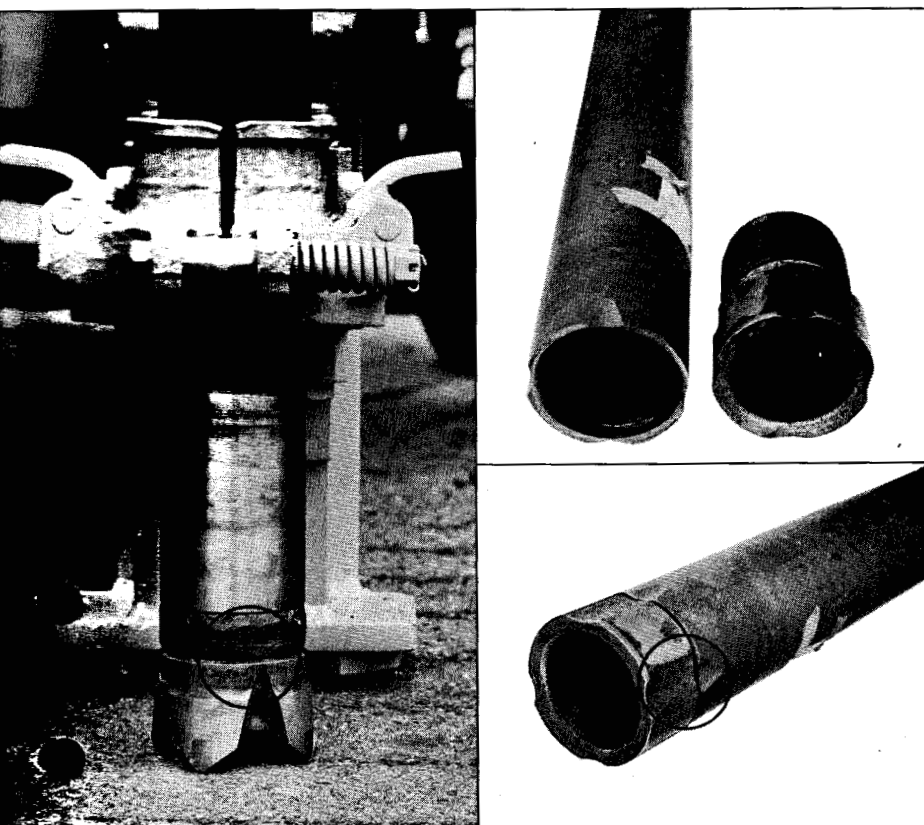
Unfavourable wear on the driver chuck and casing which is caused by the cutting grooves of the bit coming against the same section of the driver chuck each time the bit is mounted
